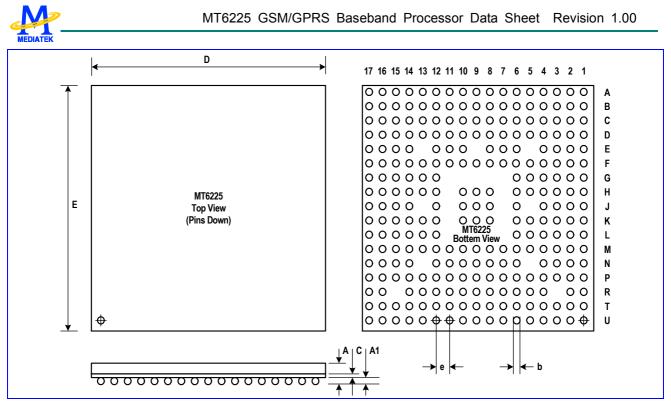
Outlines and Dimension of TFBGA 12mm*12mm, 264-ball, 0.65 mm pitch Package
